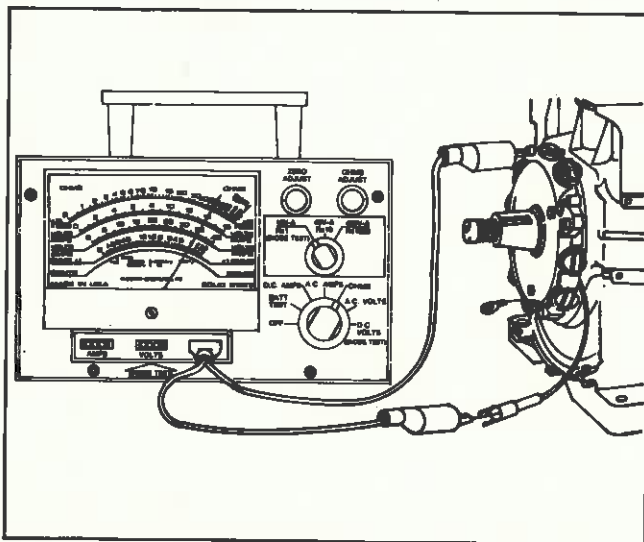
Checking for Grounded Wire in Stator Assembly
